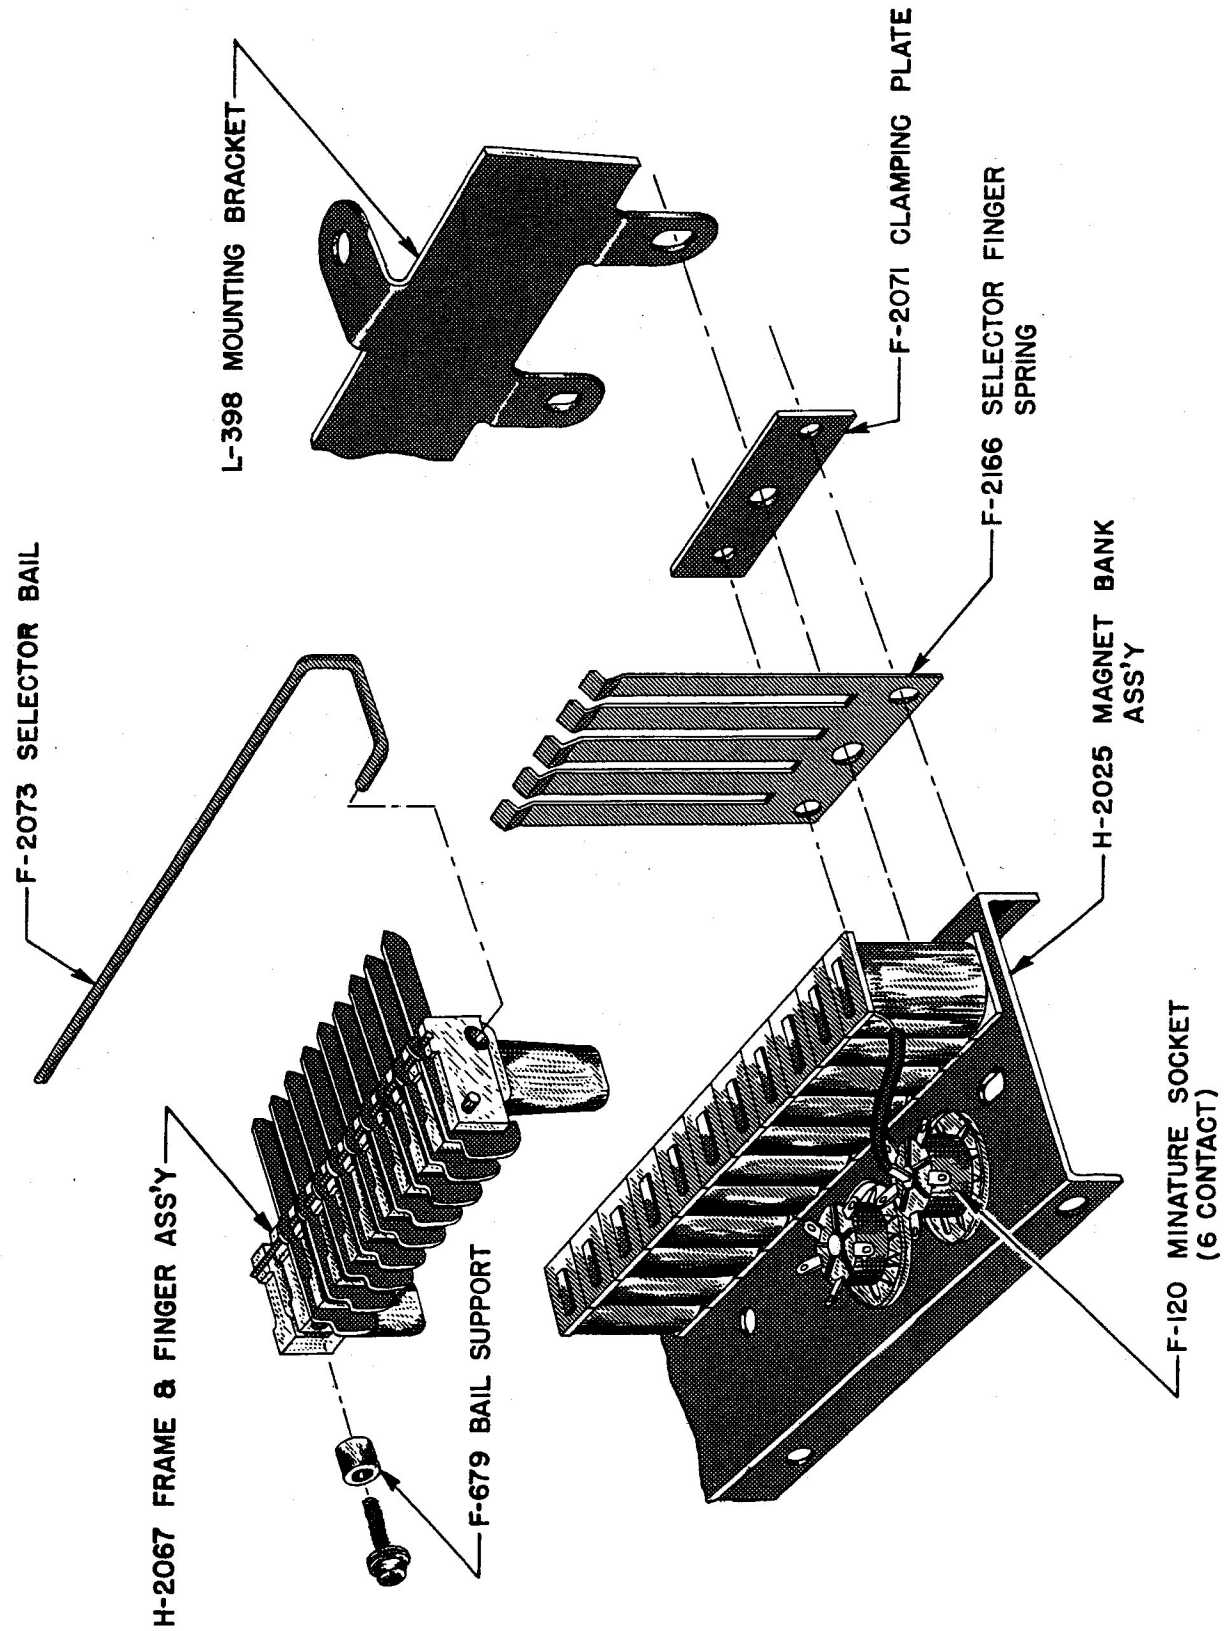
H-2065 MAGNET BANK AND FRAME ASSEMBLY PARTS GROUP
